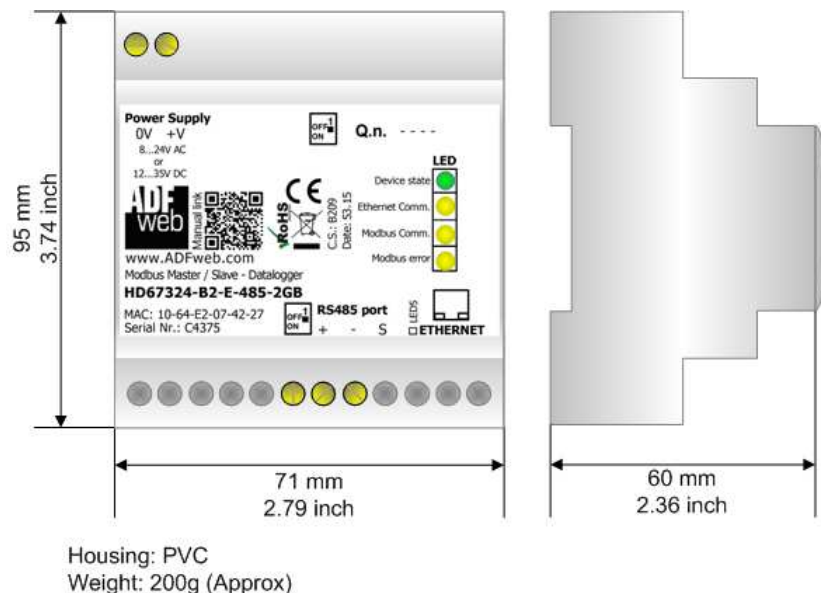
Mechanical Dimensions for HD67324-B2-E-xxx-xGB
